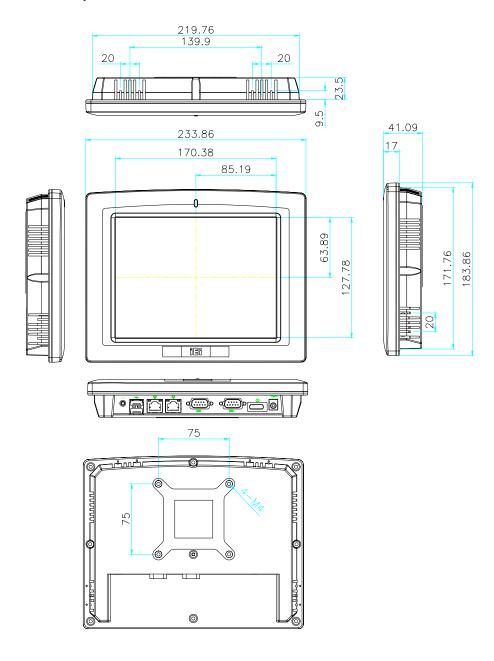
AFL-08AH-N270 Dimensions (mm)
